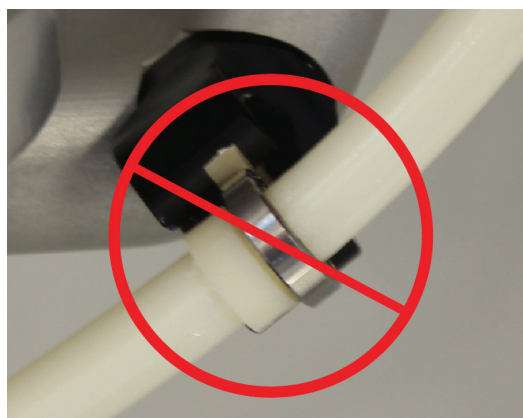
Incorrect Lower Drive Tube Bearing installation
